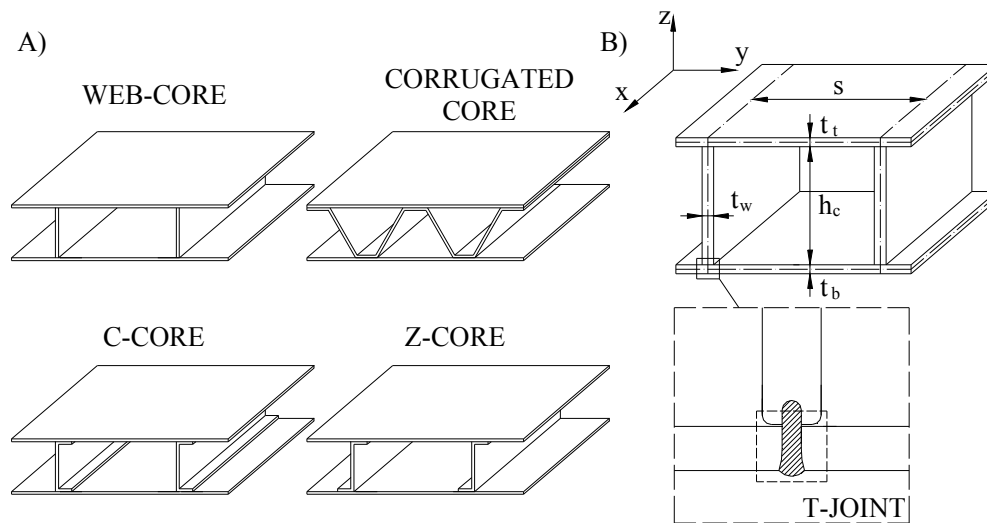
A) Different types of all-metal sandwich plate topologies and B) the cross-section dimensions and the laser weld of web-core sandwich plate.
